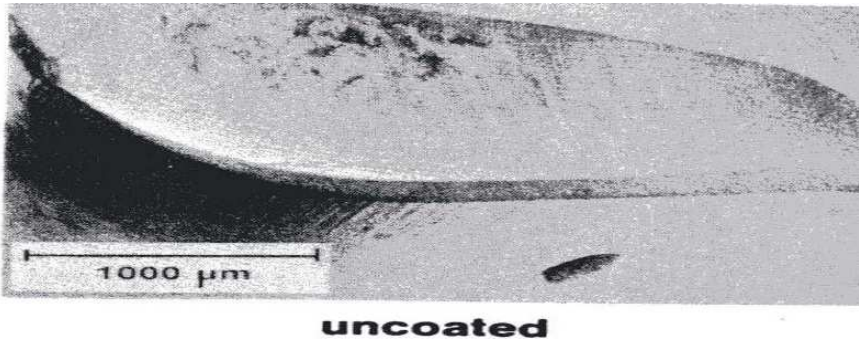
Appearance of an Uncoated Insert at the end of Tool Life After Machining 1045 AISI Steel [58]
